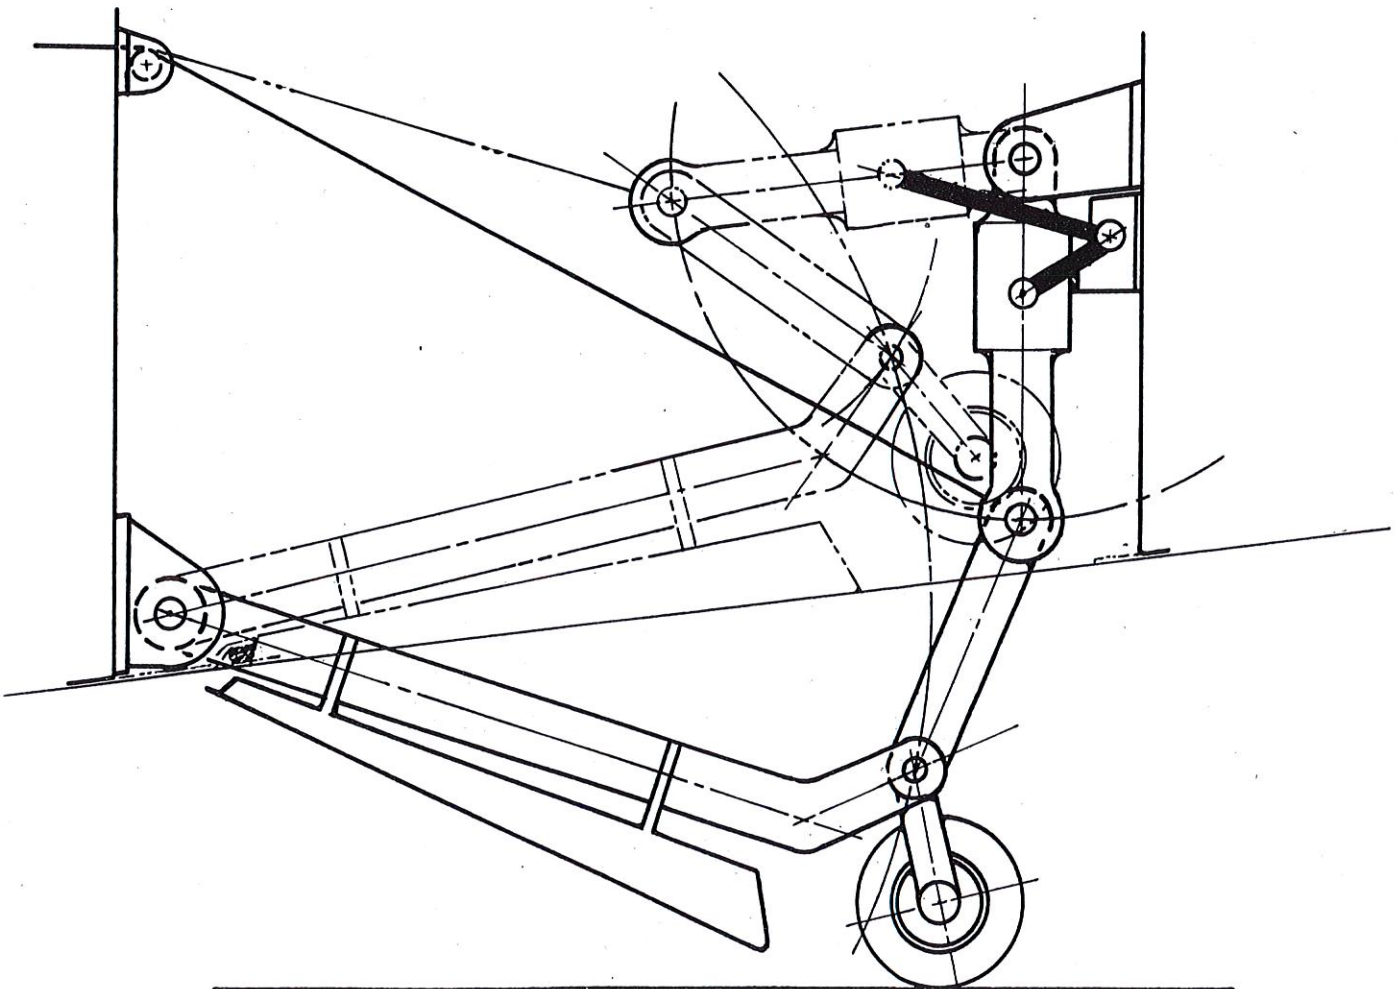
MECHANICAL LAYOUT OF TAIL WHEEL MECHANISM
